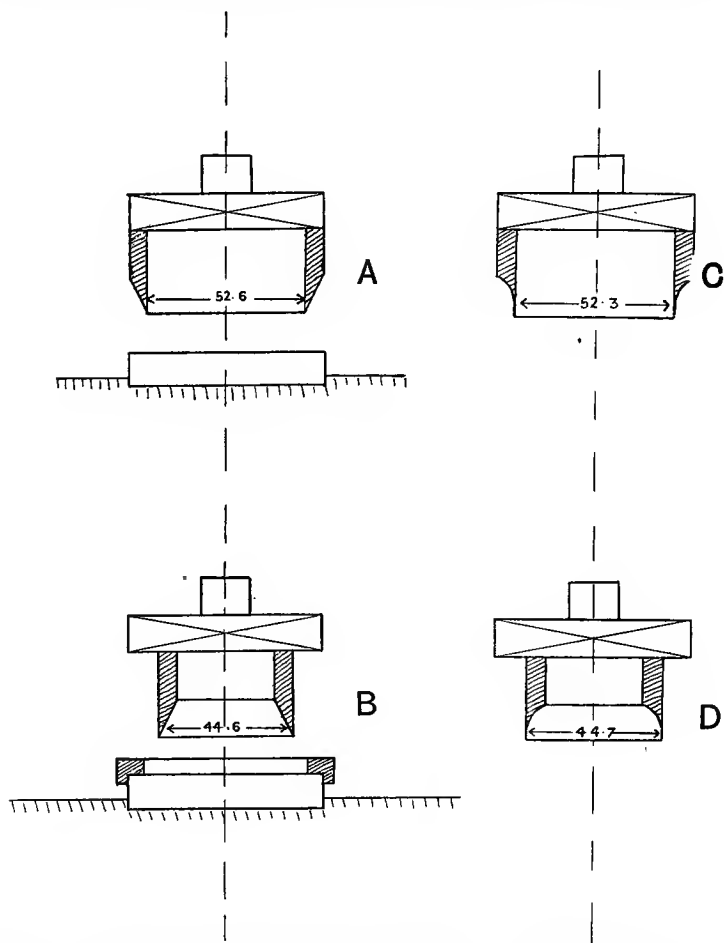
Schopper Cutters for punching Test Rings. A and B old, C and D new, style
